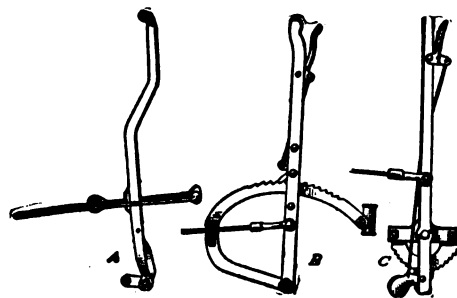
Three types of brake levers: *a* Colorado foot lever; *b* Giesler handle; *c* Palla handle
